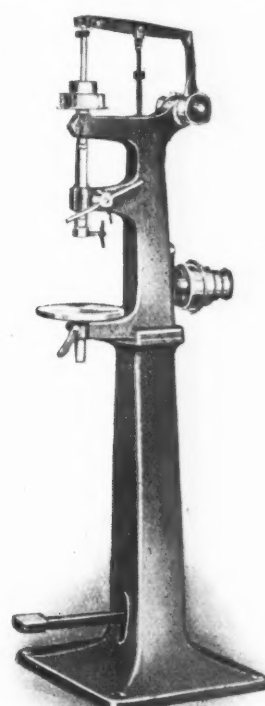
No. 29. Column Drill equipped with Lever and Treadle Feed
